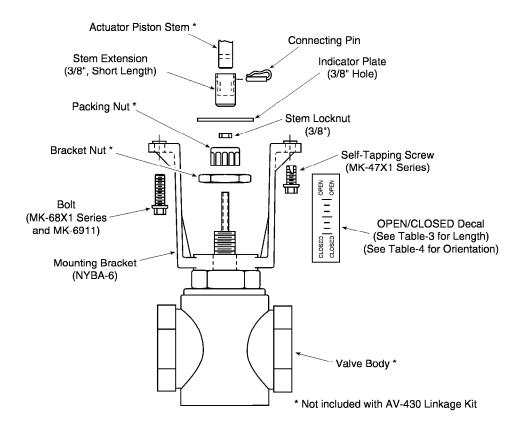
Assembly of MK-47X1, MK-68X1, and MK-6911Series Actuators with VB-202, -212, -252, -304, -804, -817, and VB-9323 (2-1/2" to 6") Series Valve Bodies.
